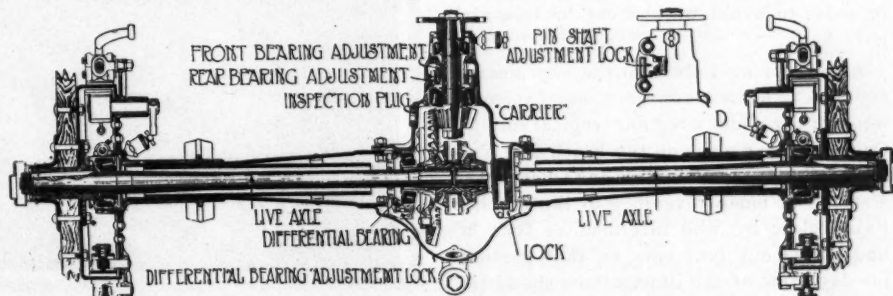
SECTION OF HUDSON REAR AXLE SHOWING THE ADJUSTMENTS
